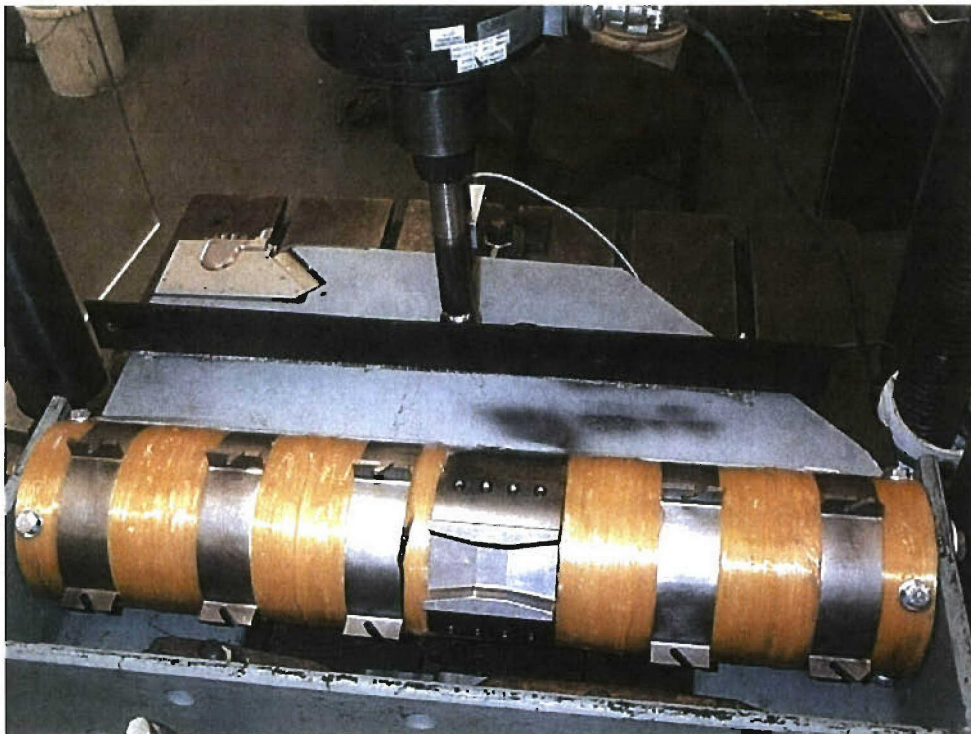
Wing Test Loading Fixture (Front Side).
